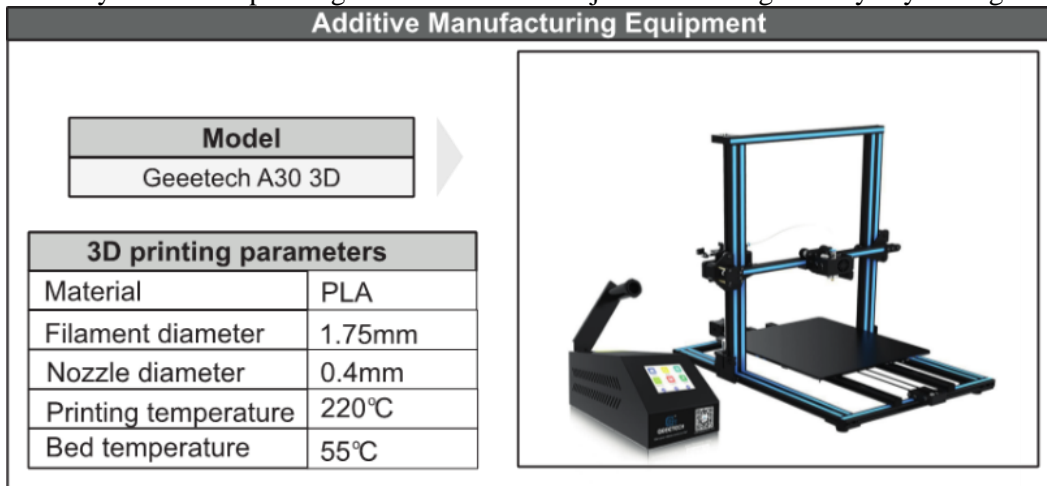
Main 3D printing parameters and Geeetech A30 3D printer.
